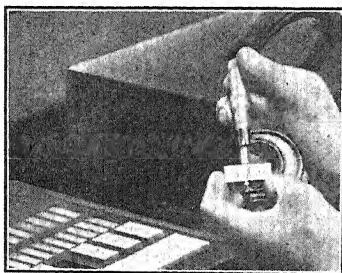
Checking a Micrometer Caliper for Accuracy with a Johansson Gage Block.
